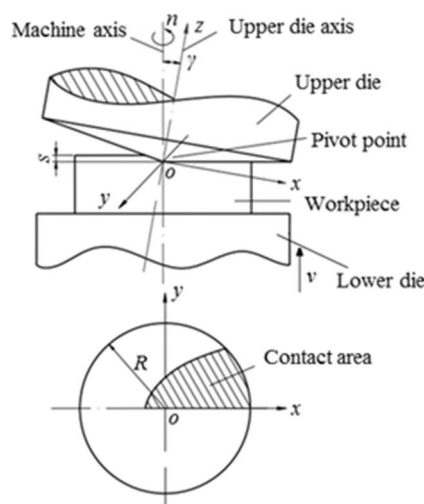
Schematic diagram of rotary forging of a cylindrical workpiece [3]
